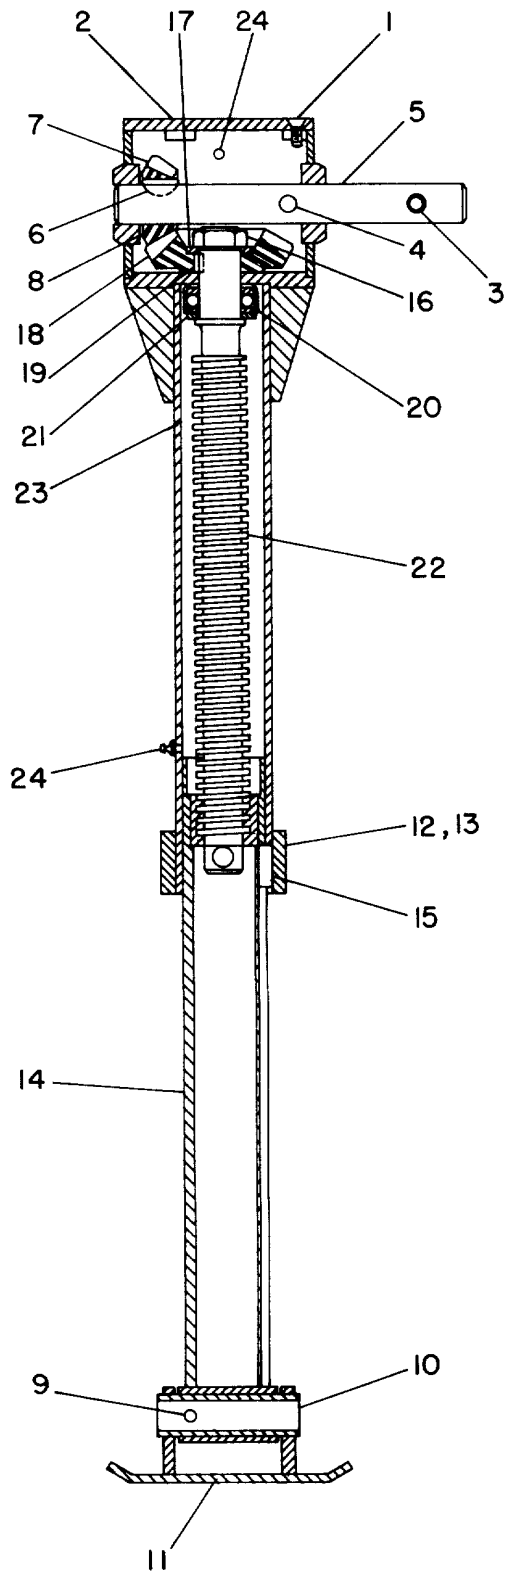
Landing Gear Assembly (Sheet 3 of 3)
